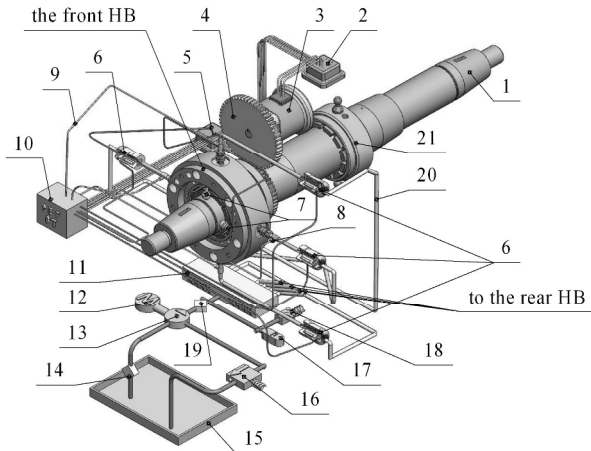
Schematic solution of adaptive ACS (for front adjustable spindle HB): 1 - spindle; 2 - stepping motor controller; 3 - stepping motor; 4 - wheel gear; 5 - adaptive controller; 6 - proportional flow valves; 7 - contactless laser sensors; 8 - dynamic pressure fluid sensors; 9 - connecting cables; 10 - flow valves regulator; 11 - hub flows; 12 - electric motor; 13 - hydraulic pump; 14 - roughing cleaning filter; 15 - tank; 16 - safety valve; 17 - accumulator; 18 - pressure switch; 19 - finishing cleaner filter; 20 - hydrodynamic bearing; 21 - thrust
